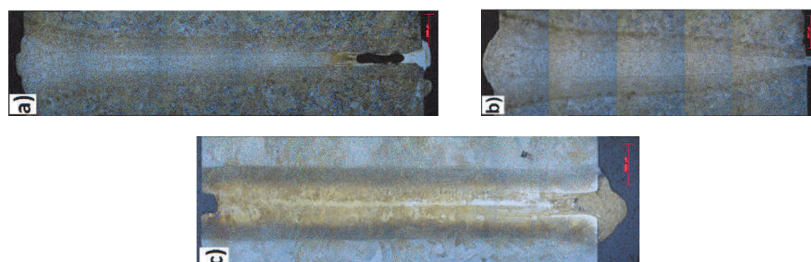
EB welds with solder to fill the root: a) sample S4; b) sample S5; c) sample T4
